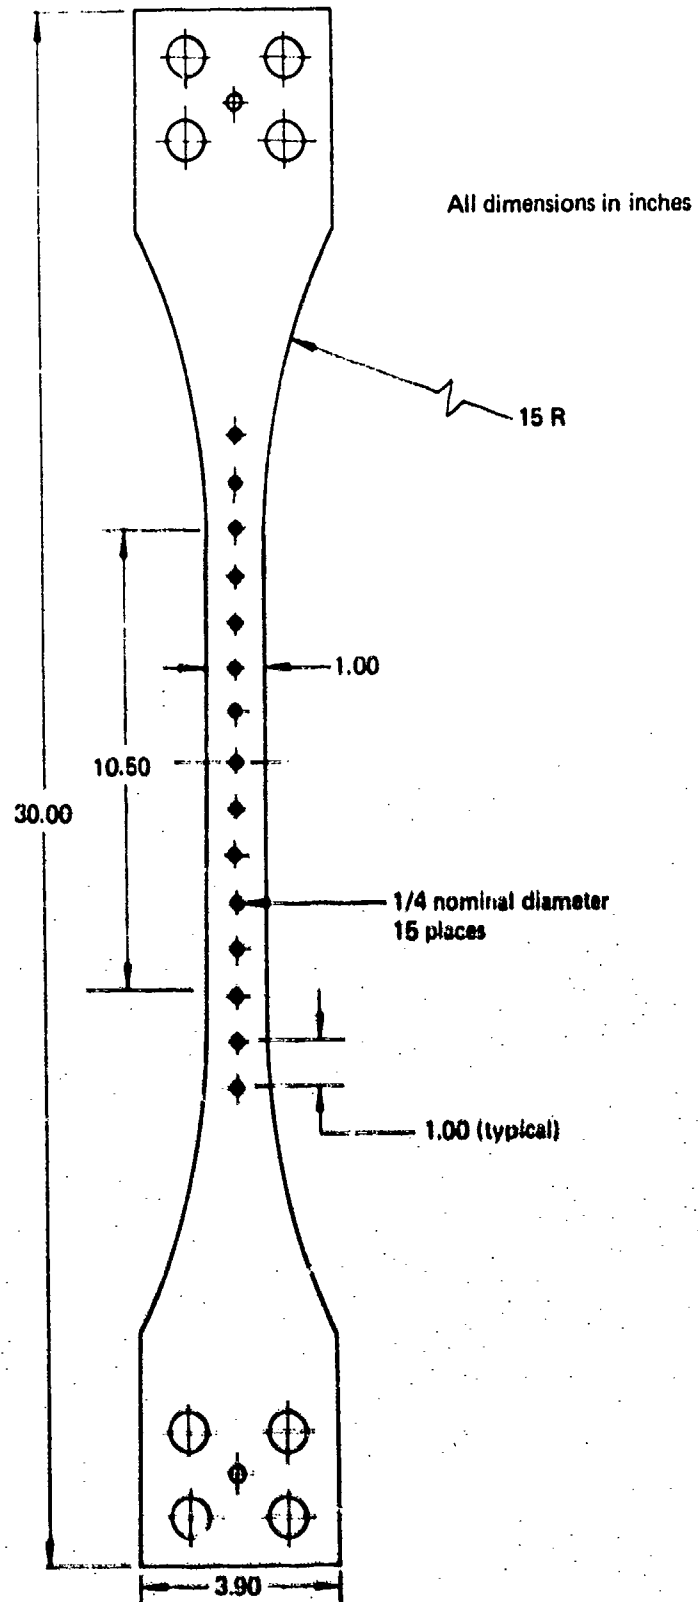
Zero Load Transfer--15-Hole Fatigue Coupon
